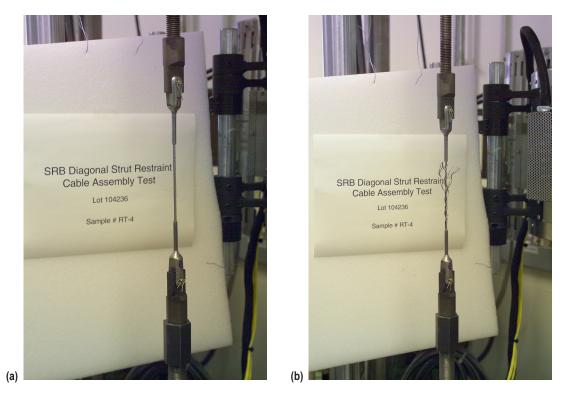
104236–RT–4 (a) before testing and (b) after testing.
